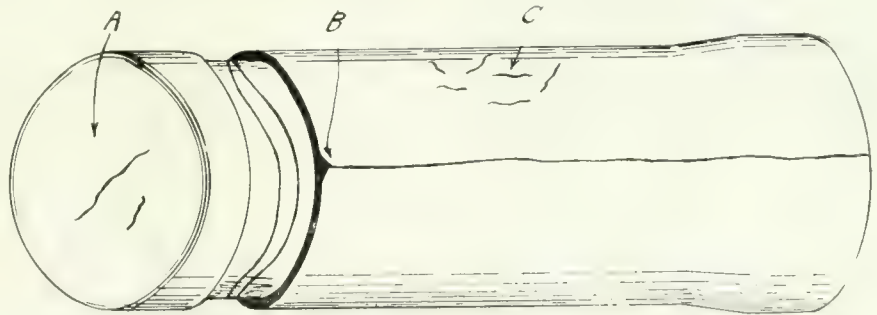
DEFECTS IN SHELL FORGINGS
